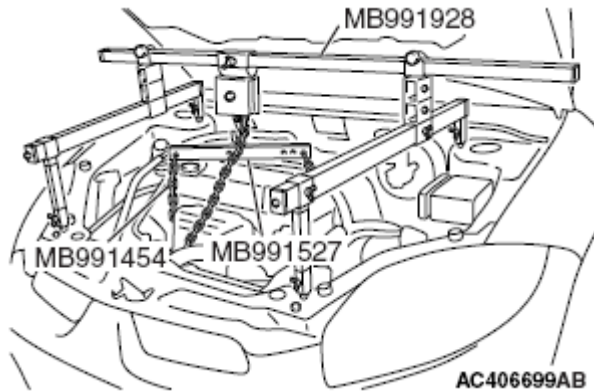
Supporting Engine With Garage Jack Using Special Tool MB991928
